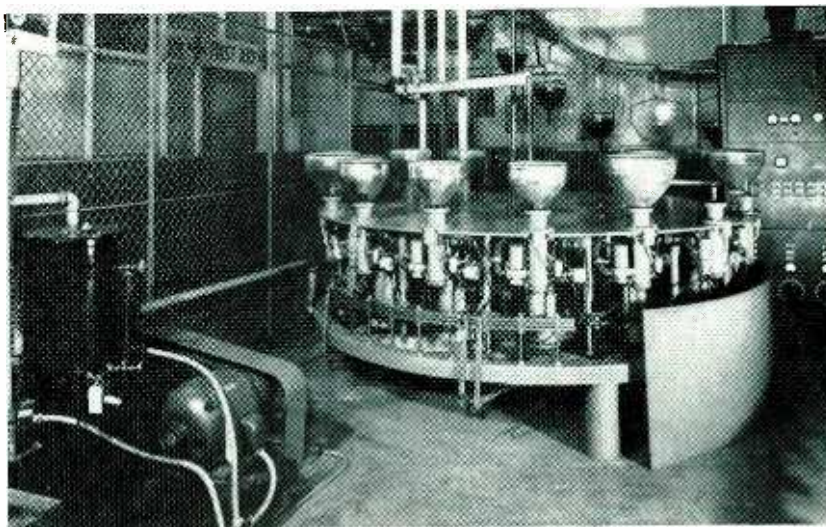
In this aluminizer machine, each tube position has a separate diffusion pump and electrically operated roughing and bypass valves. Mechanical backer pump at left connects through a rotating joint
